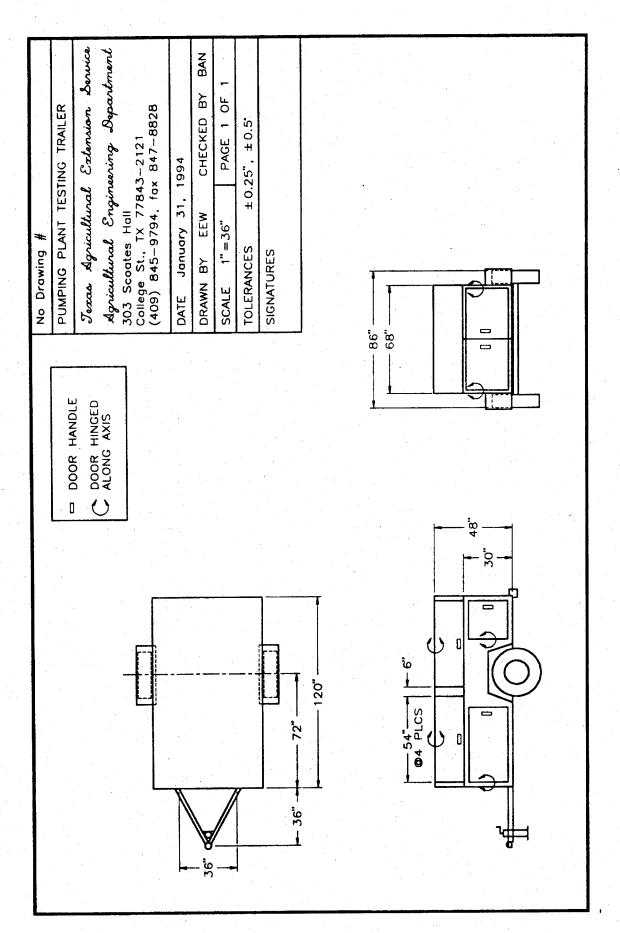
Drawing of custom designed trailer for storing and transporting testing equipment.
